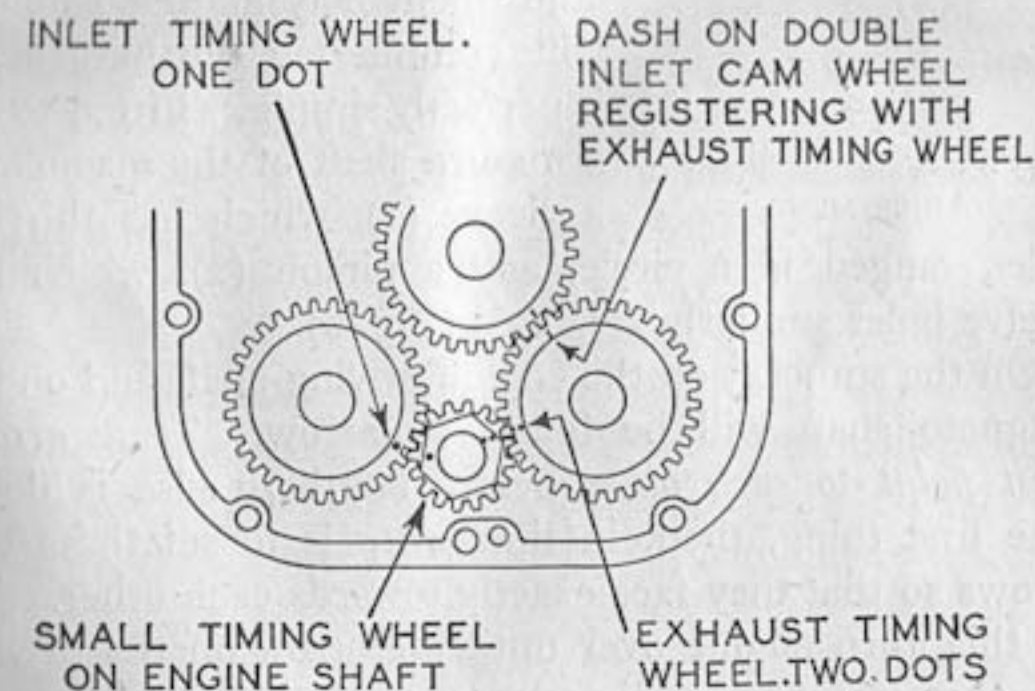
TIMING-WHEEL SETTING ON TWIN-CYLINDER ENGINES.
